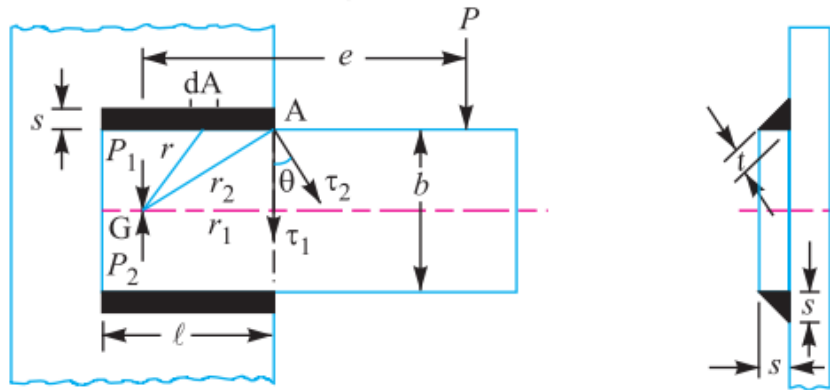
Eccentrically loaded welded joint.
